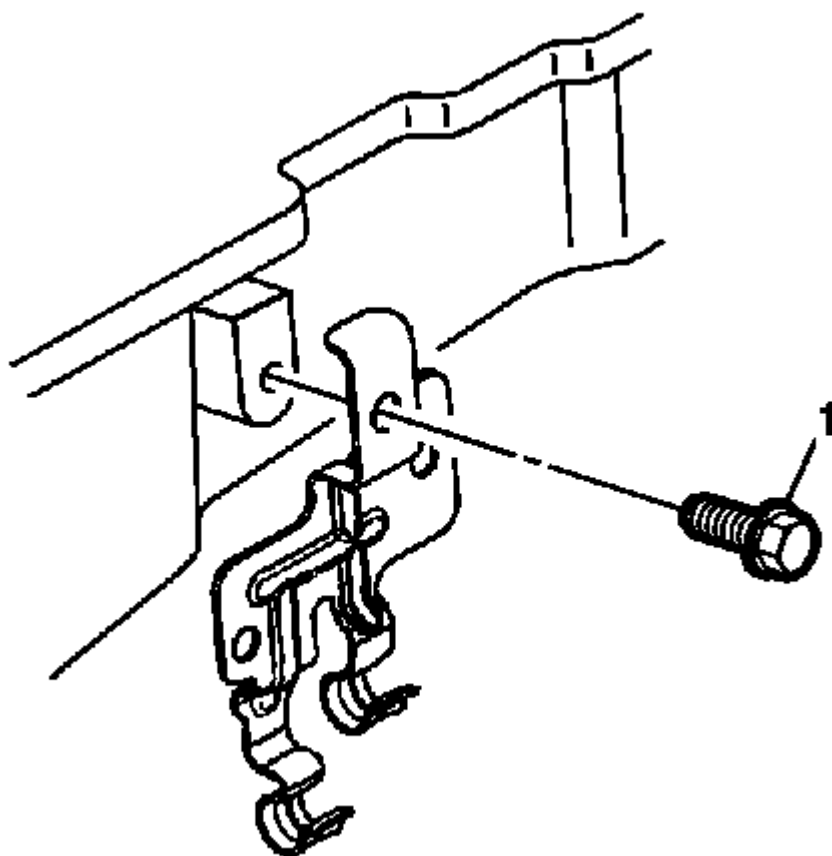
View Of Positive Battery Cable Clip & Bolt
